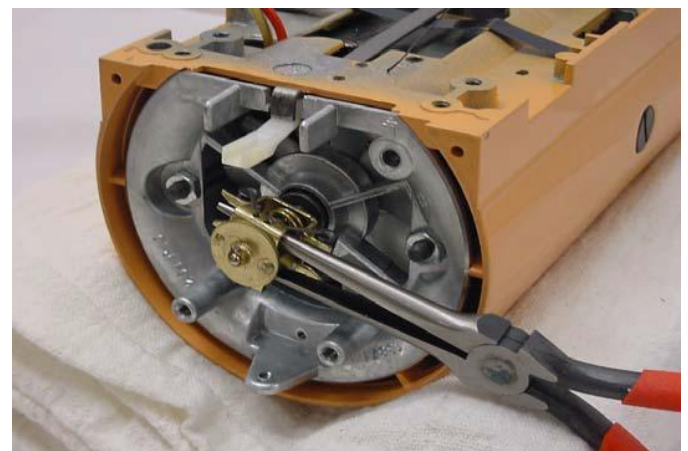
Removal of the phase control board from the bearing bracket.
